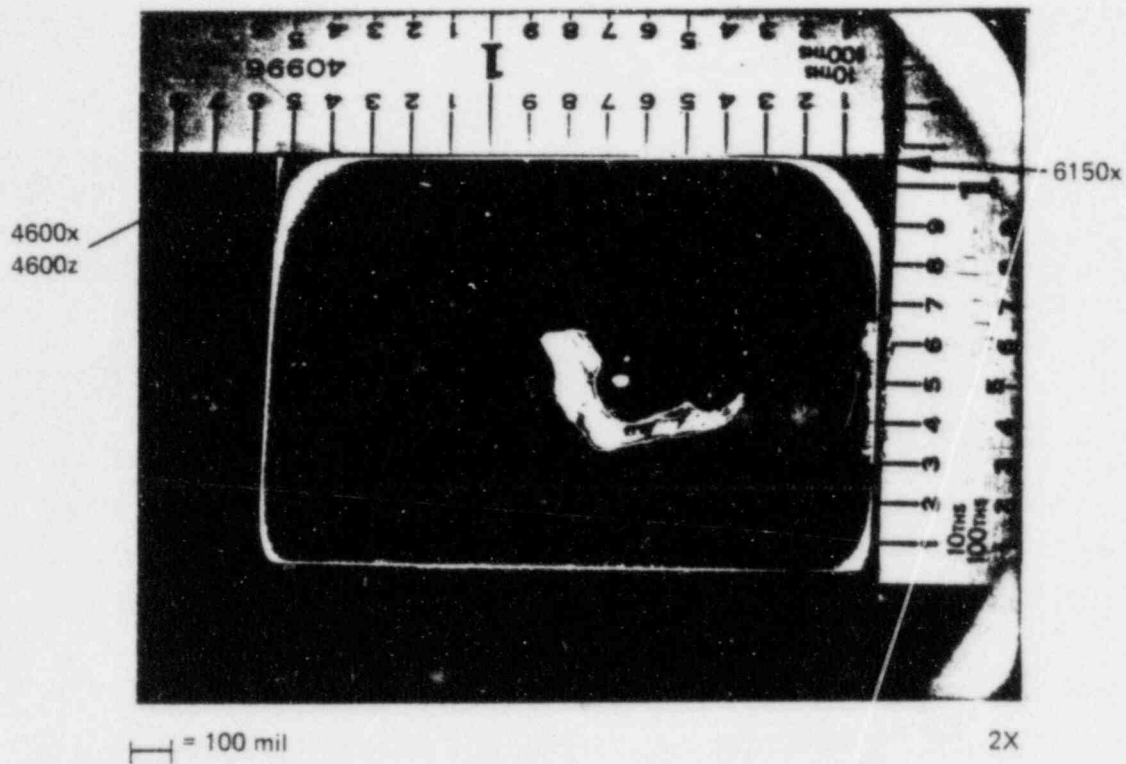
BUTT-WELDED CARBON STEEL PLATE -
